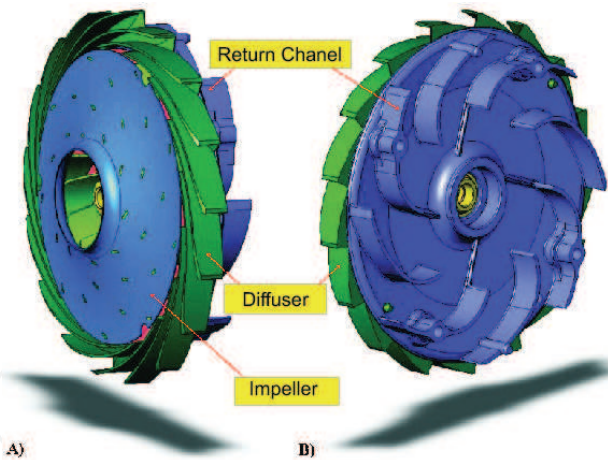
Description of centrifugal fan system, A) front view, B) back view
